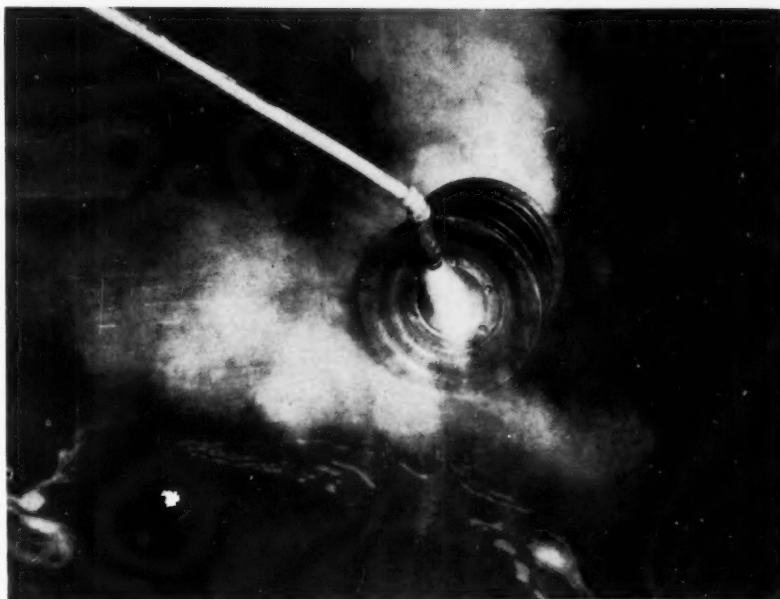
The first operation in rebuilding tractor rollers is to steam clean them to remove dirt, grease and other foreign matter which, if not removed, could cause unsound welds.
